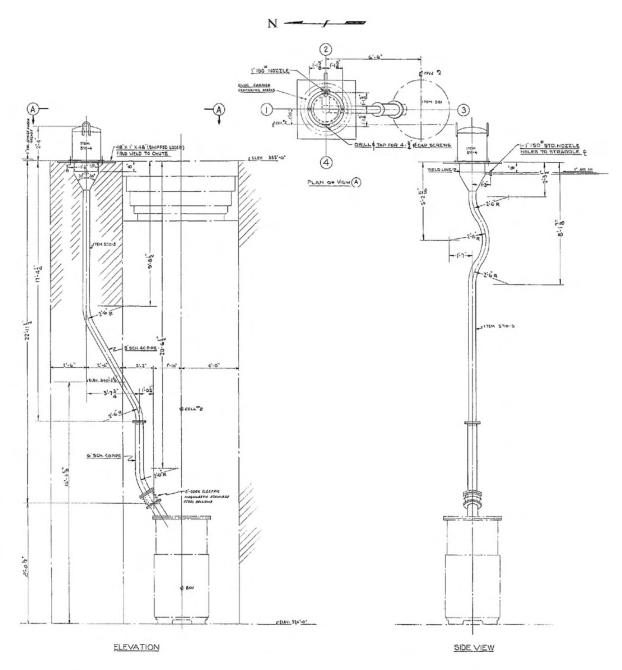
Drawing No. 2828-570-2 Slug Chute, October 14, 1948
